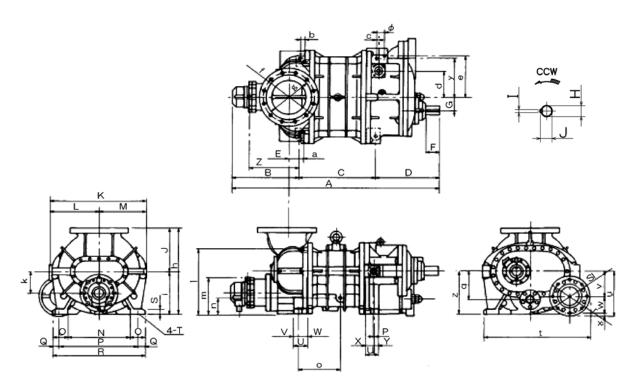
Outer Dimensions 160V\*D, 200V\*D, 250V\*D, 250VLLD (Sideways discharge type)
